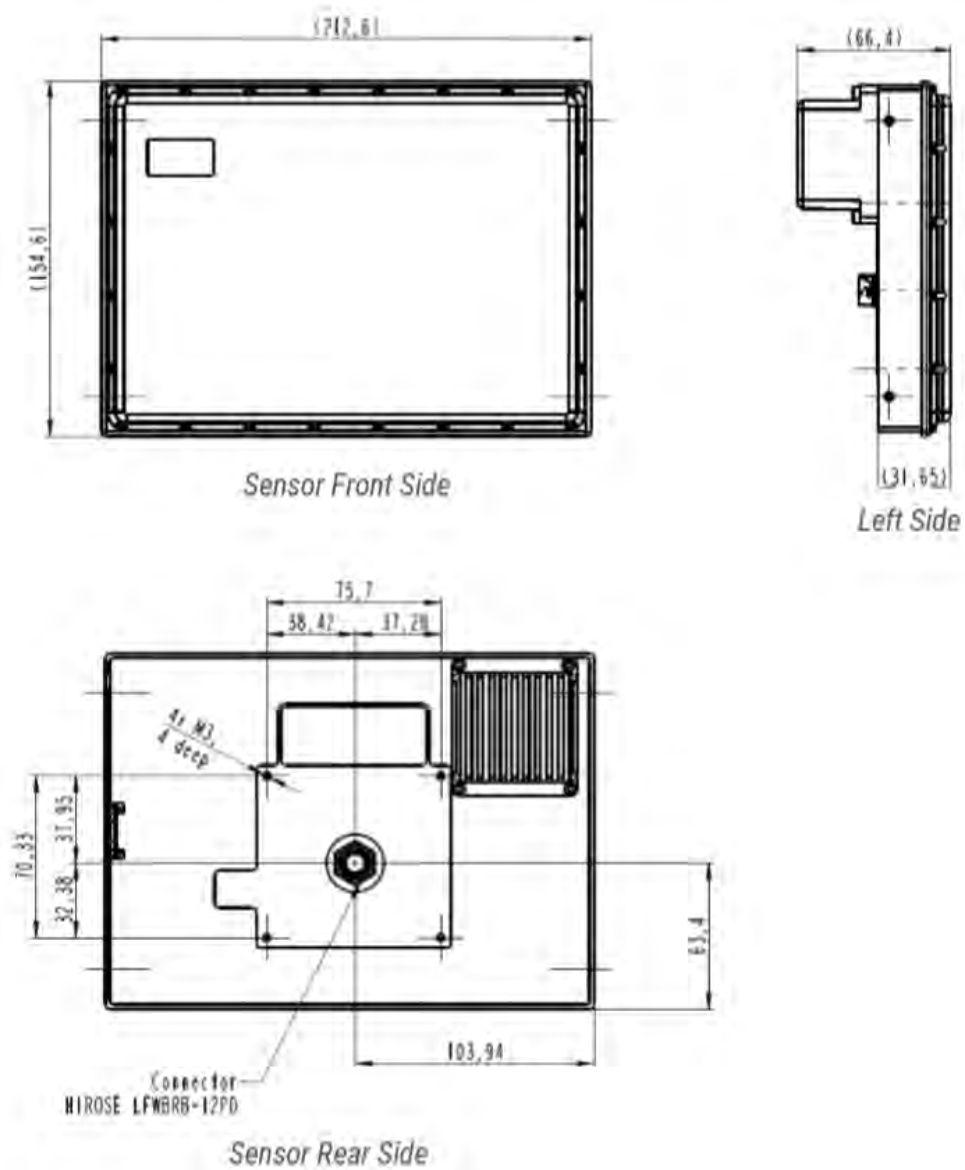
Dimensions of TRUGRD Stream Sensor
